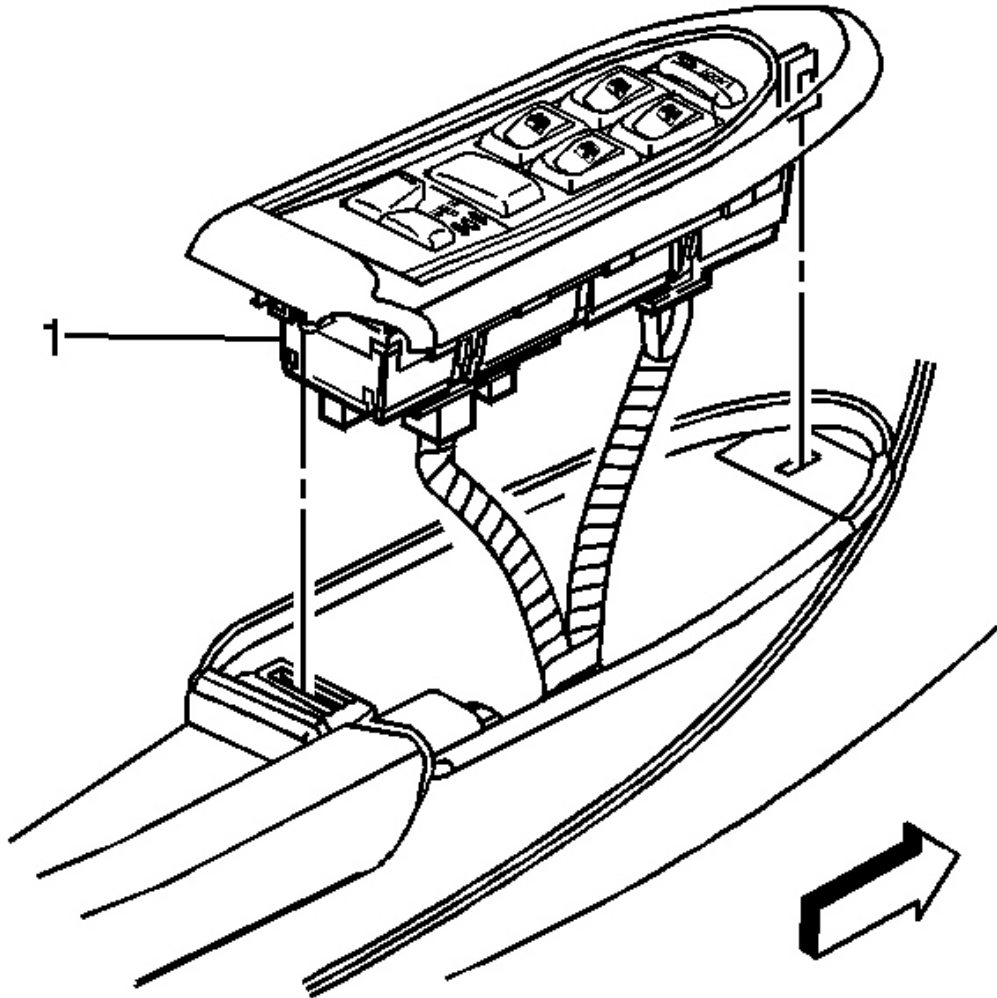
Identifying Door Lock & Side Window Switch - Driver
